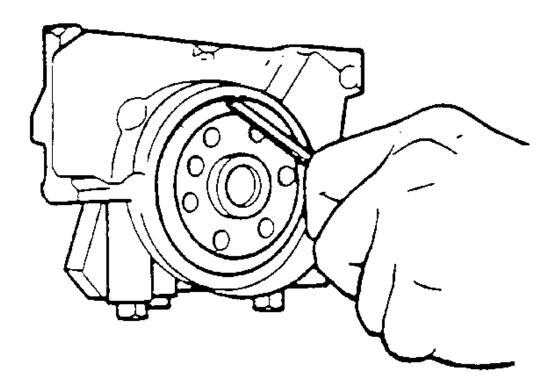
Removing Crankshaft Rear Oil Seal Courtesy of GENERAL MOTORS CORP.
